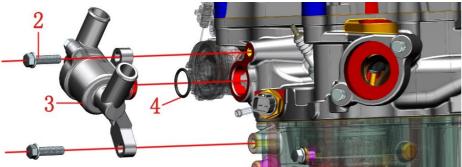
CYLINDER HEAD ASSEMBLY		Cylinder head outer parts	СНК	Q
